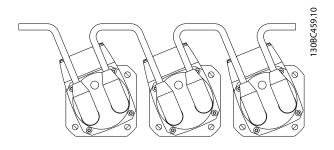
Hybrid Cable Connection for IEC Flange
